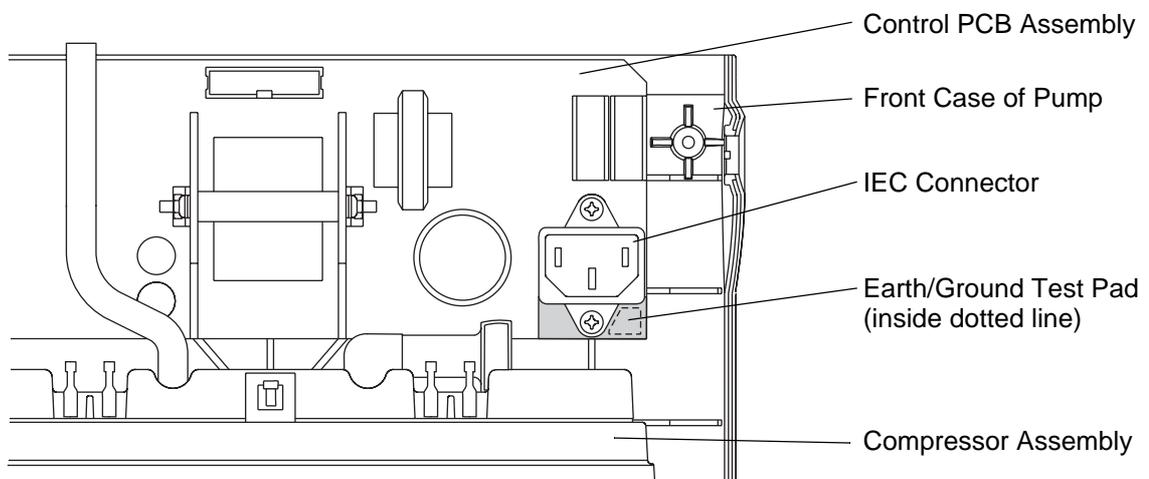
Earth/Ground Test Area on Control PCB Assembly
